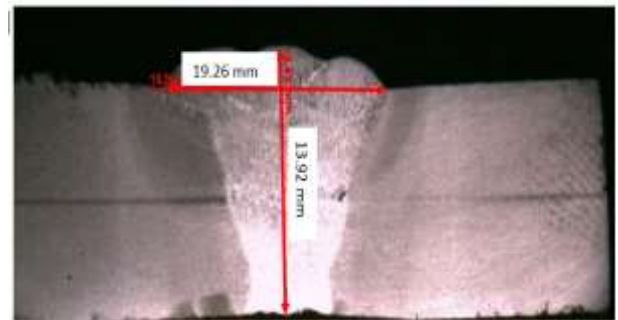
Macroprofile of carbon steel welded at heat input of 1250 J/mm.
